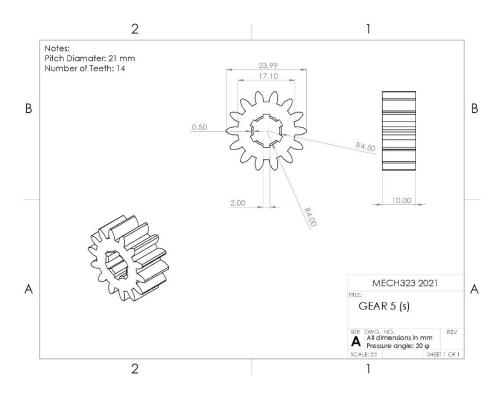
CAD drawing for the final design of Gear 5 (s).
